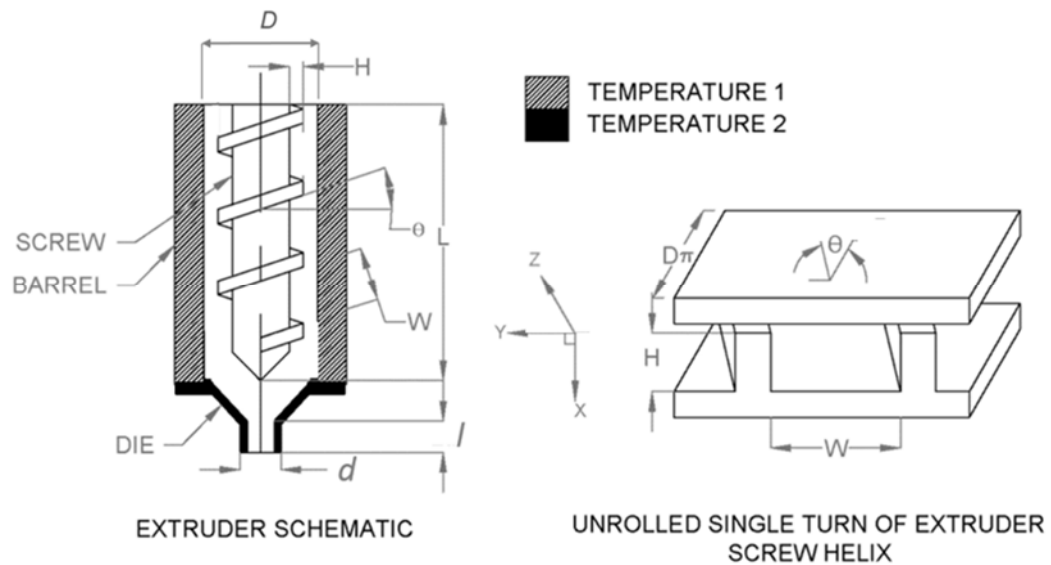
PED extruder schematic and unrolled single turn of the extruder screw helix with geometric parameters.
